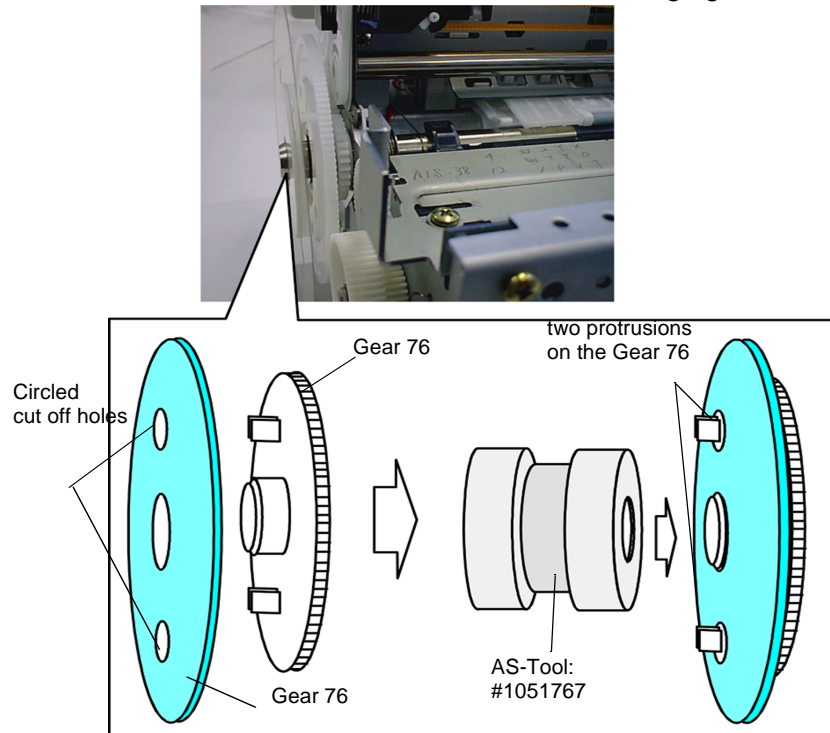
Stick the PF Loop scale unit on Gear 76
